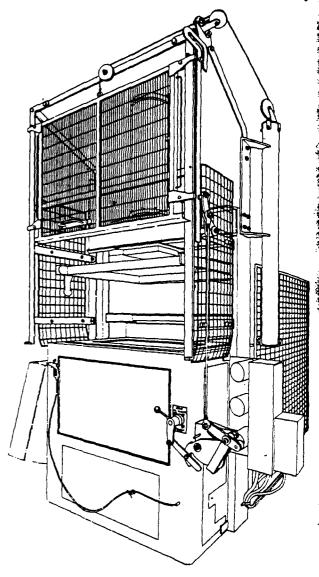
A fully guarded vacuum-forming machine with the safety gate open. In this state, it is impossible to operate the clamping frame until the safety gate is fully closed due to the mechanical interlock between the safety gate and the operating lever. An electrical interlock prevents operation of any other part of the machine until the clamping frame is closed. (By courtesy of the British Plastics Federation.)
